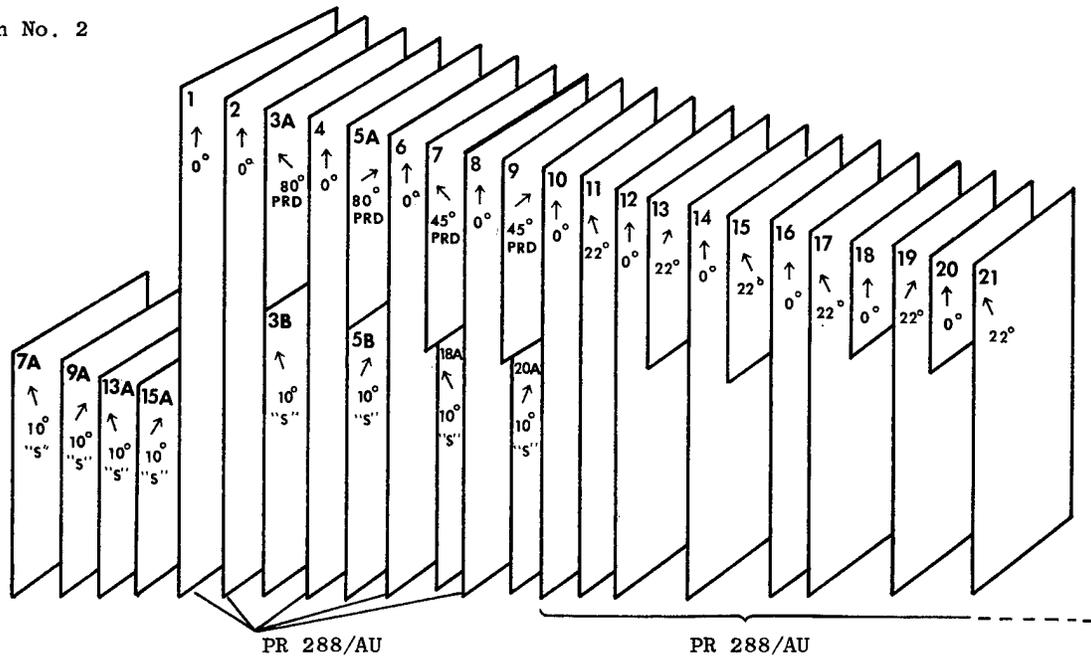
Manufacturing Layup of Selected Design Whiriligig Test Blades.
